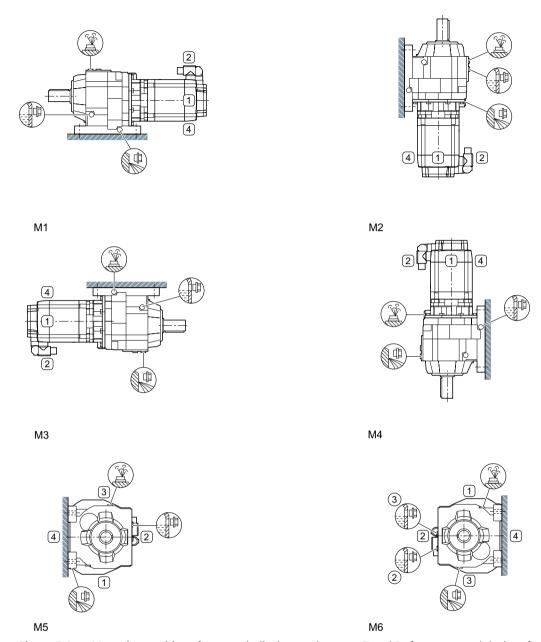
Mounting positions for servo helical geared motors Z and D, foot-mounted design, frame sizes 39 - 129, 2 stage and 3 stage
